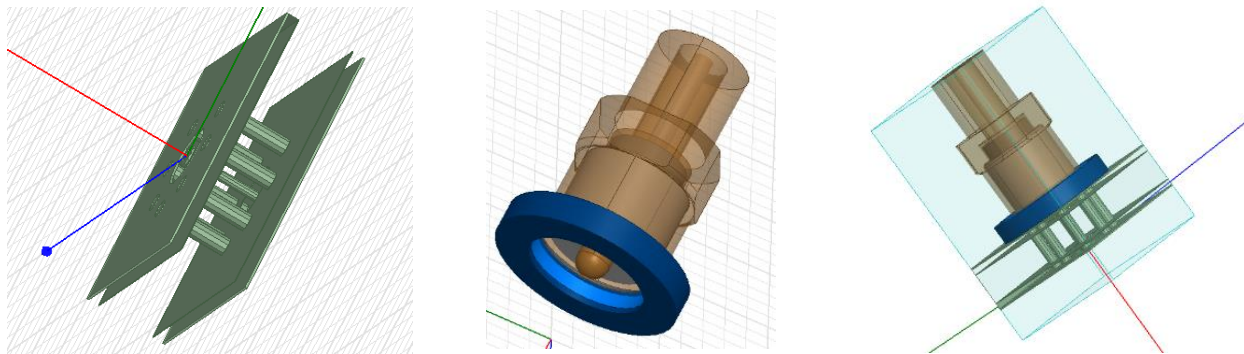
PCB, Samtec connector and PCB assembled with Samtec connector
